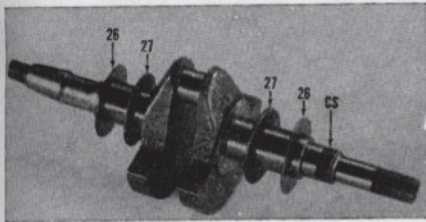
Be sure the steel thrust washers (26) are to outside of thrust bearings (27) when installing crankshaft on models XL-12, Super XL-12 and XL-15. Other models do not use thrust washers or thrust bearings.
